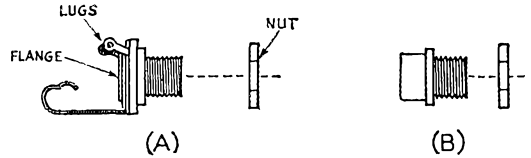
By filing away the flange and removing the excess parts, a phone jack (A) becomes a panel bearing (B).
